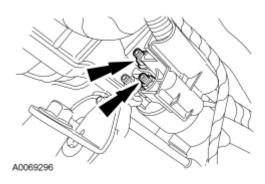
Disconnecting Starter Electrical Connections Courtesy of FORD MOTOR CO.
